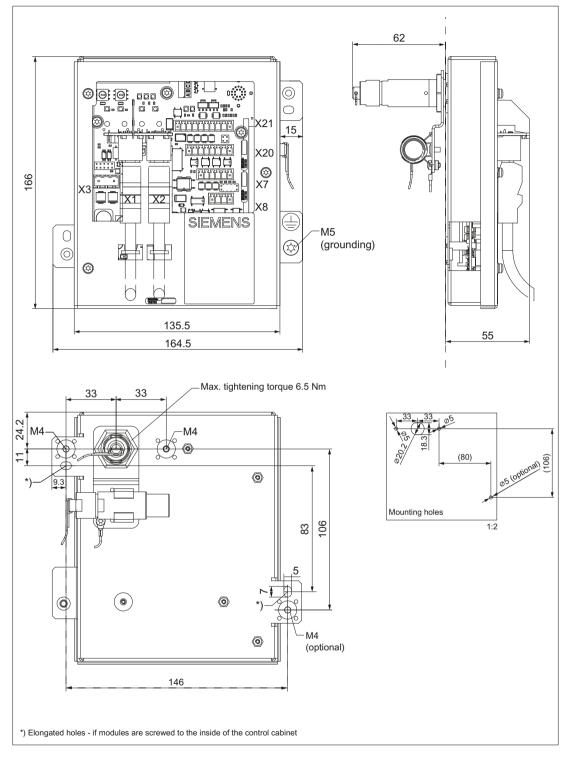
Connection module Basic PN - dimension drawing for control cabinet installation
